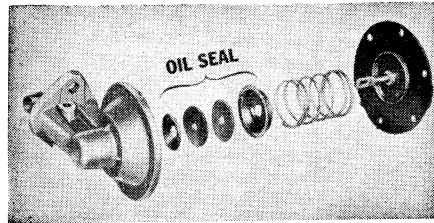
Series R. Assembly sequence of oil seal when parts are separate
